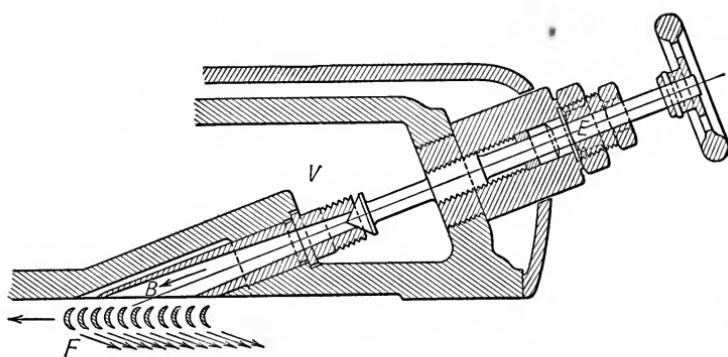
Nozzle and Vanes for Single-stage Turbine.
